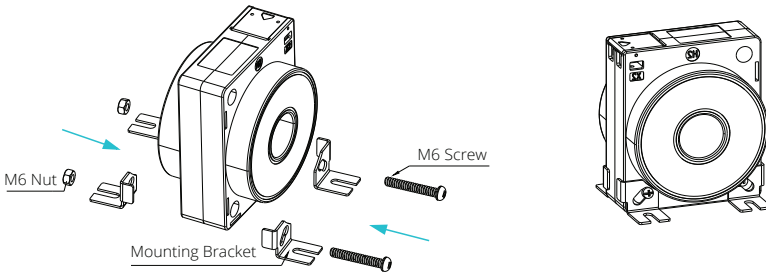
Mounting Brackets Installation for AcuCT S125 Series
